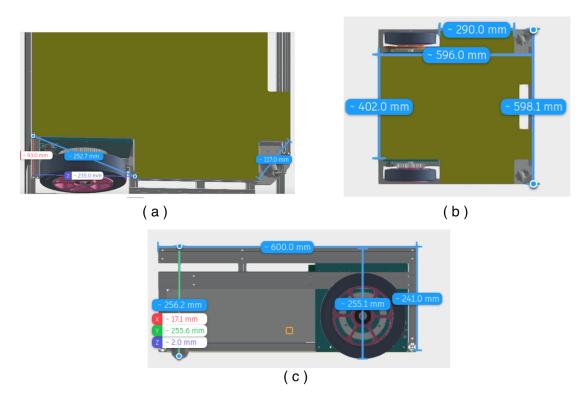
(a) is angled view for wheels, (b) is the top view and the (c) is side view
